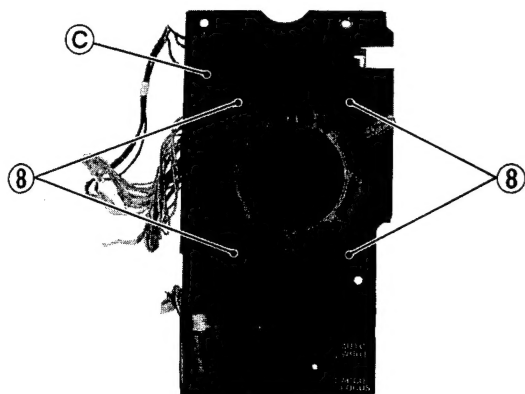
Removing the Optical Filter Assembly
